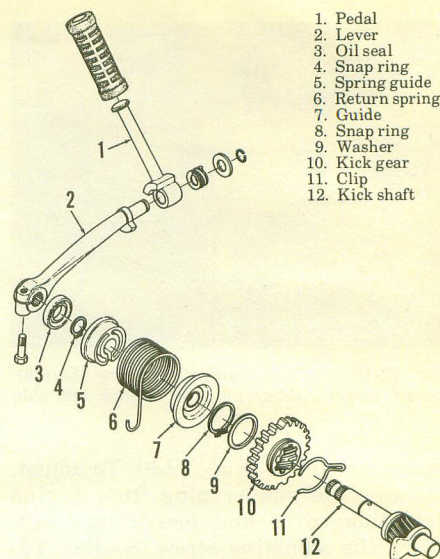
Exploded view of kickstarter typical of HS-1, HS-1B and LS2 models.
